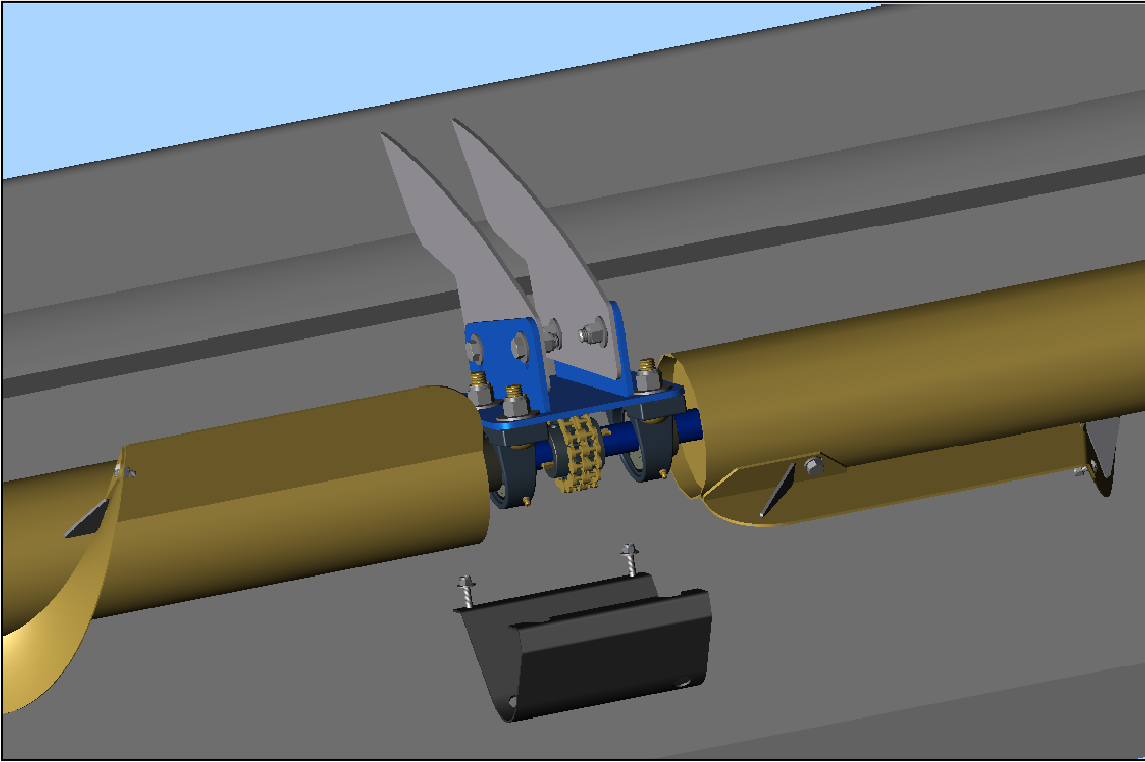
CENTER MOUNT 30 FT WITH PLASTIC GUARD REMOVED (FRONT VIEW)
